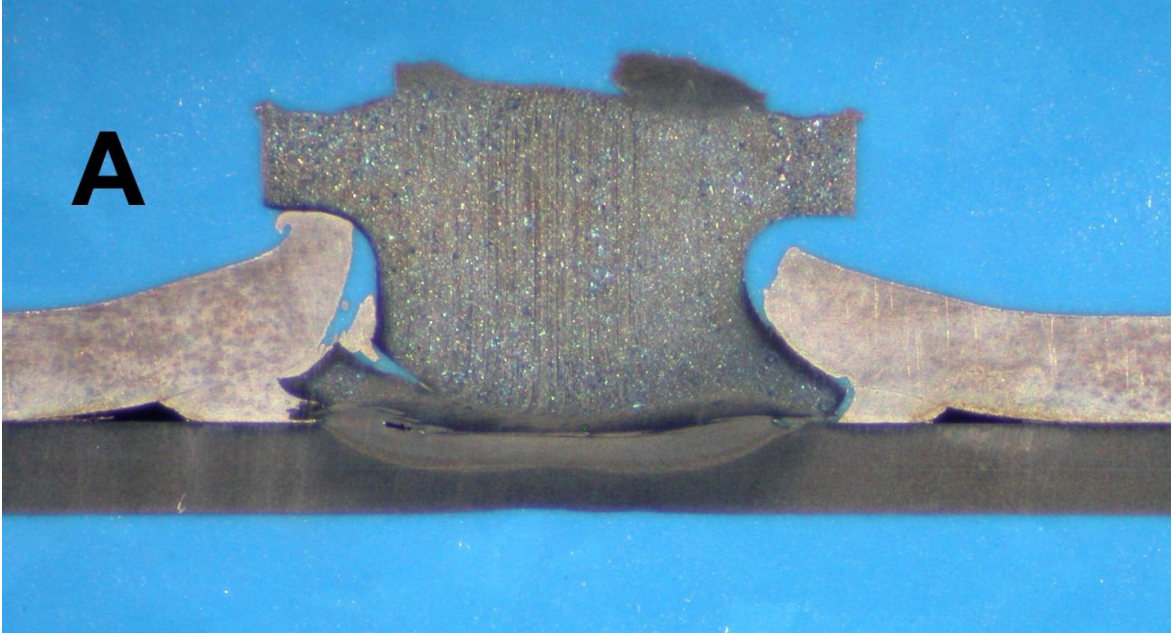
Sample A, nominal welding depth 3.3 mm
